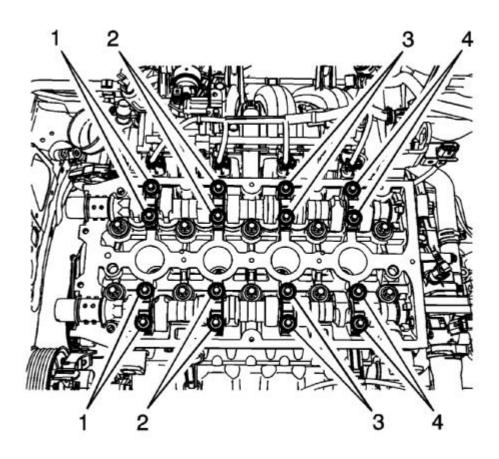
Camshaft Position Solenoid Valve Housing And Bolts Courtesy of GENERAL MOTORS COMPANY
